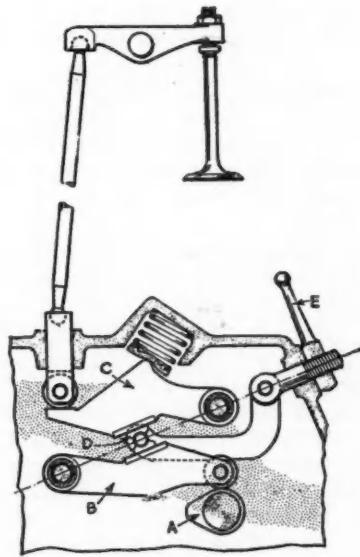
By this mechanism the camshaft is advanced or retarded relative to the crankshaft
